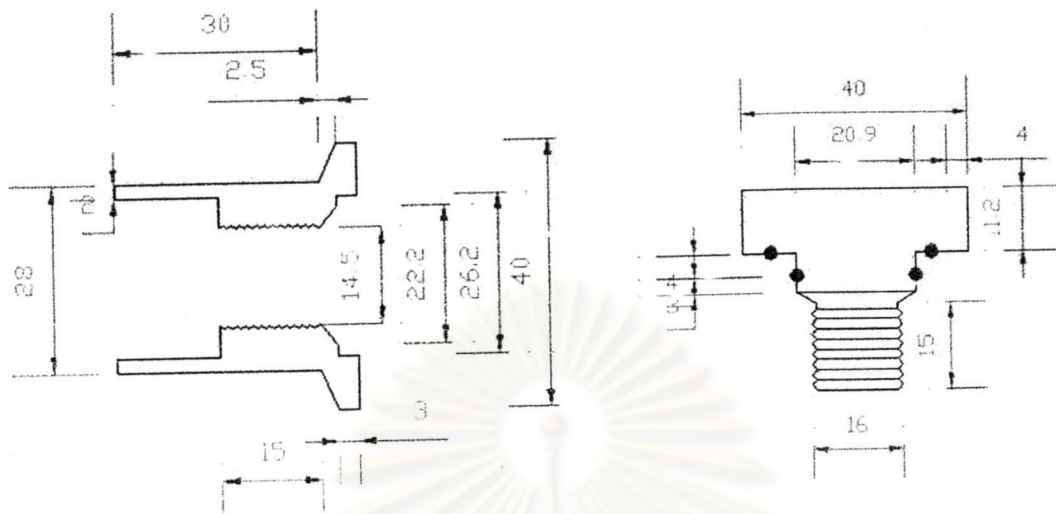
NW 25 tube and NW 25 plug (in mm unit)
